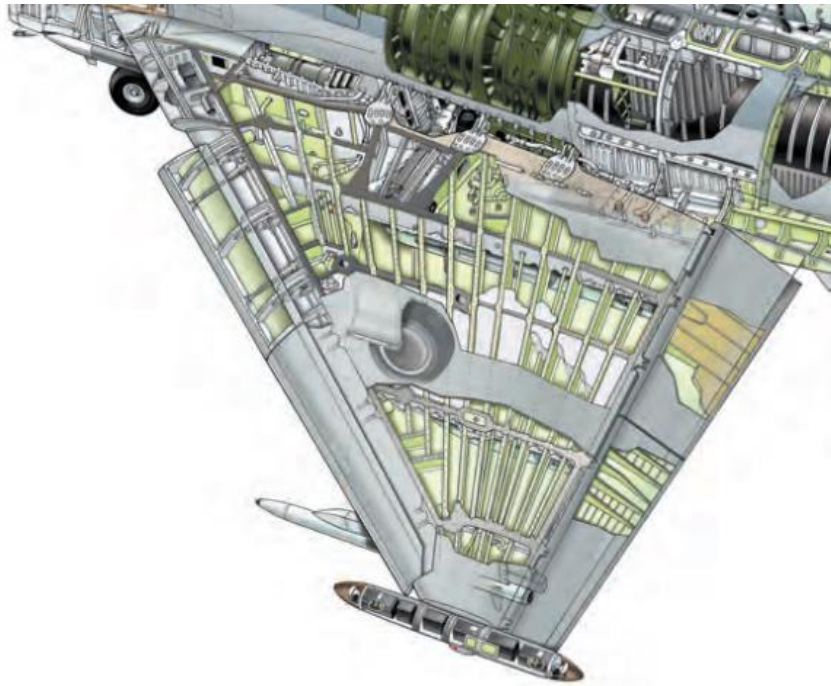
Eurofighter Typhoon Structural Layout [26]
